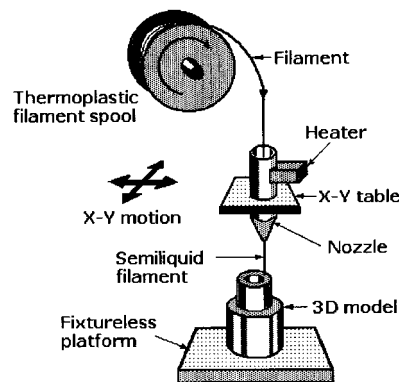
Fused Deposition Modeling (FDM): Filaments of thermoplastic are unwound from a spool, passed through a heated extrusion nozzle mounted on a computer-controlled X-Y table, and deposited on the fixtureless platform. The 3D model is formed as the nozzle extruding the heated filament is moved over the platform. The hot filament bonds to the layer below it and hardens. This laserless process can be used to form thin-walled, contoured objects for use as concept models or molds for investment casting. The completed object is removed and smoothed to improve its finish.
